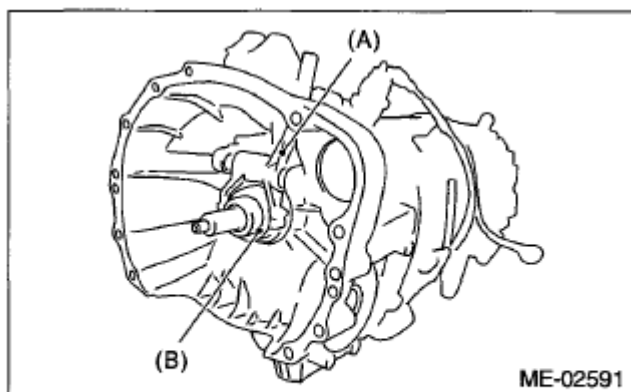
Removing Release Bearing From Clutch Cover Using Flat Tip Screwdriver
